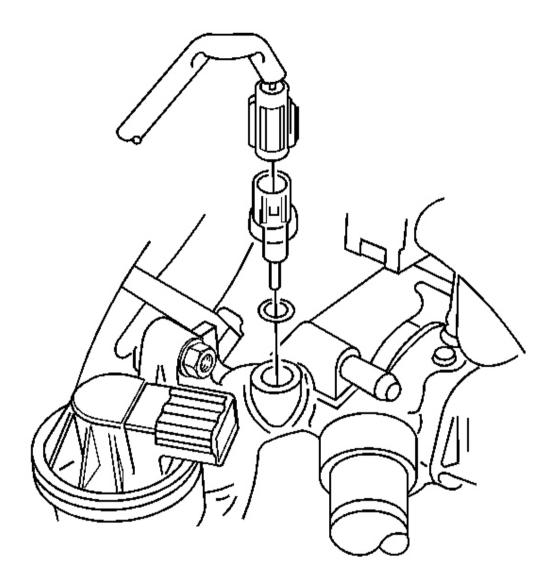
View Of Engine Coolant Temperature(ECT) Sensor Courtesy of GENERAL MOTORS CORP.
